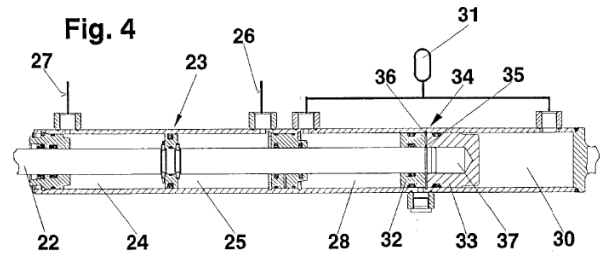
Centering mechanism disposed on the Slave cylinder.²²⁾
